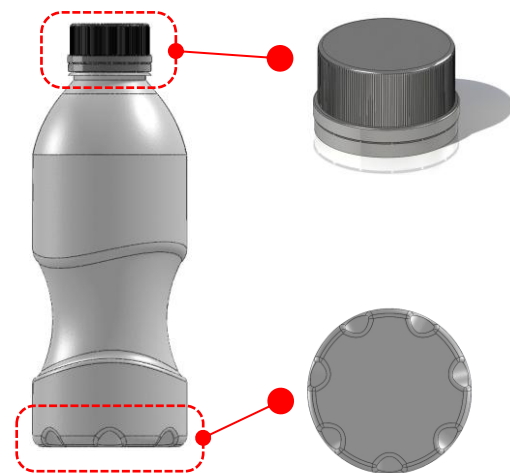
Key components of the 330-ml bottle master design – bottom area and cap.
